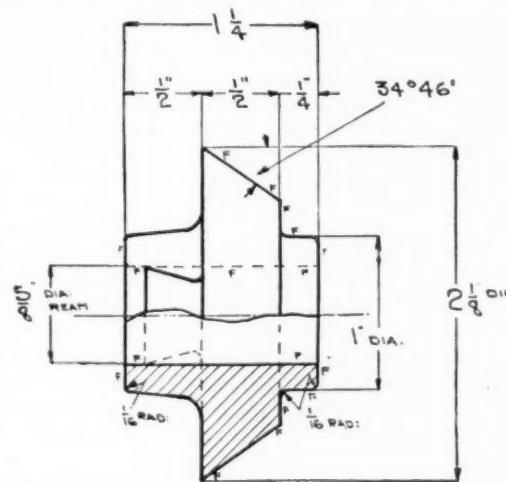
SMALL CAST-IRON BEVEL WHEEL FOR MACHINING ON UNGEARED CAPSTAN LATHE
